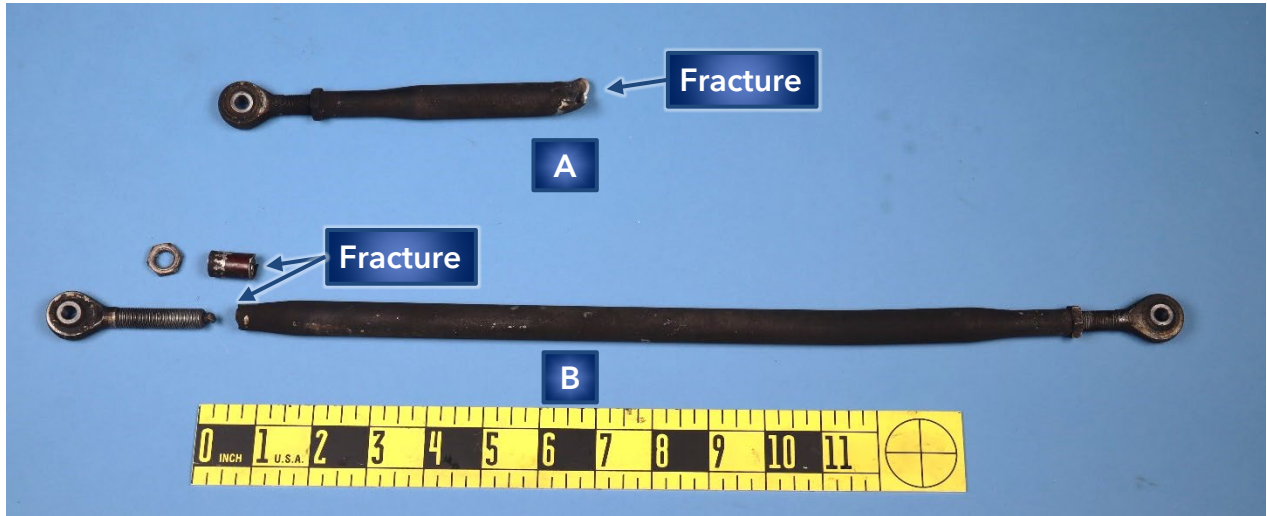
Overall view of the submitted ruddervator control rod assembly pieces.
